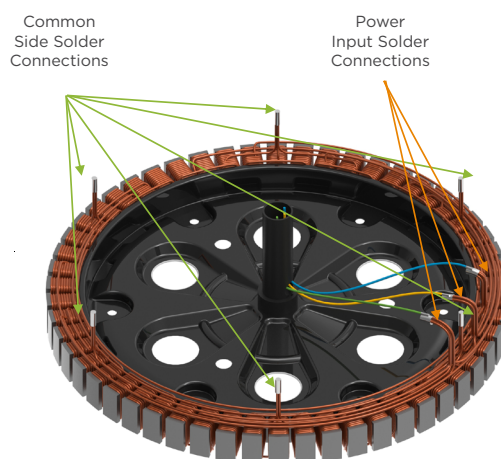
SOLDERED MAGNET WIRE SOLUTION
